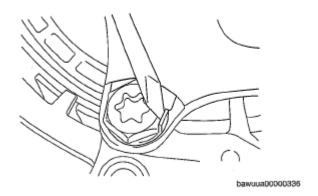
Prying Back Crimp On Lockwashers Courtesy of MAZDA MOTORS CORP.
